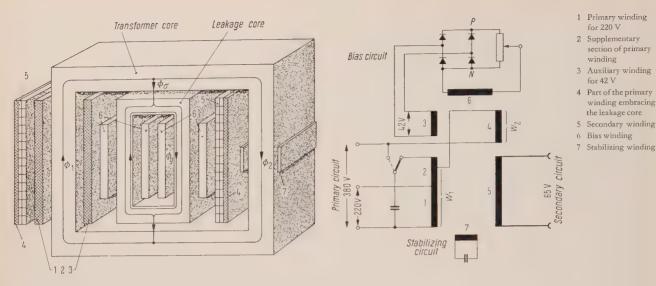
Basic arrangement and electrical circuit of the welding transformer
